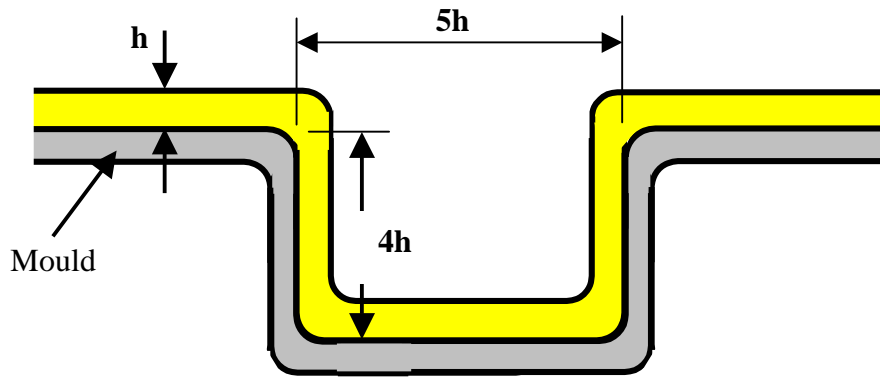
Typical dimensions of stiffening corrugations in rotationally moulded parts
